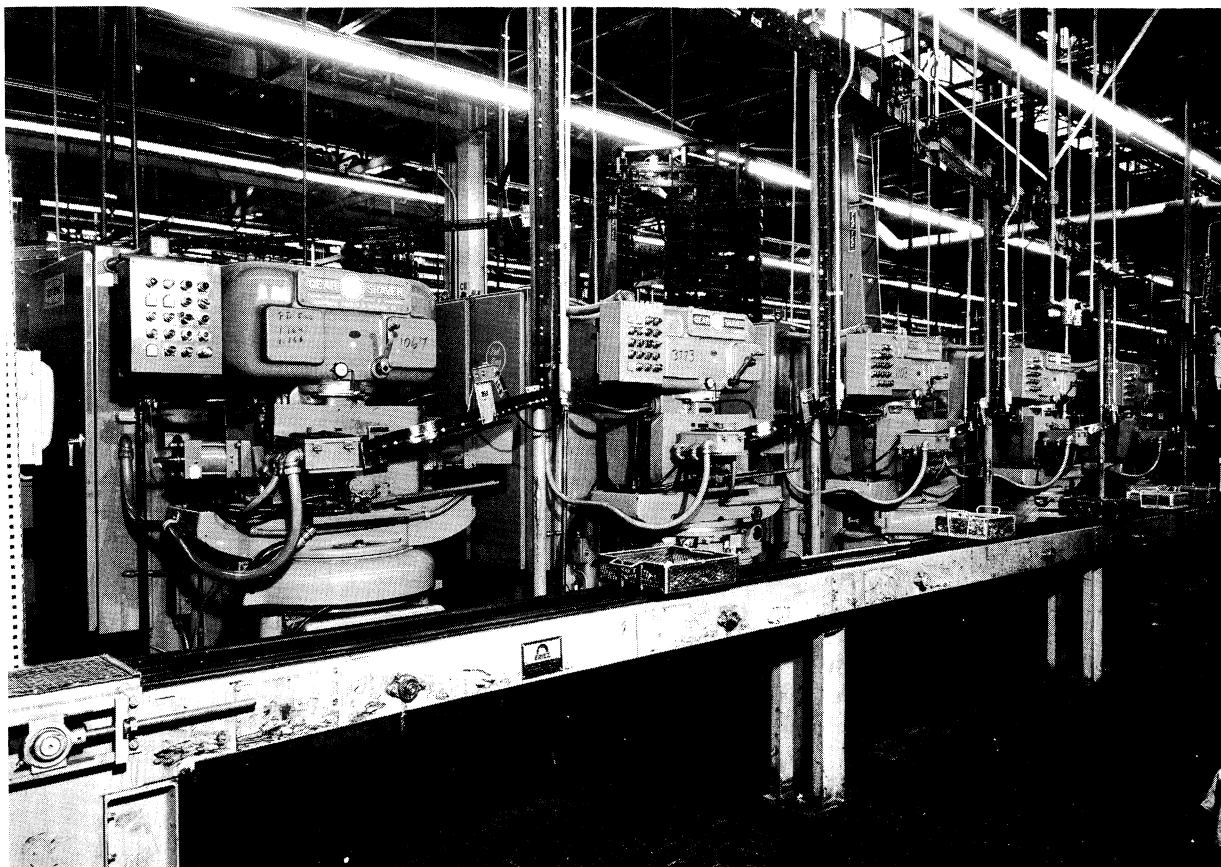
A battery of gear shavers for finishing automotive transmission planet pinions.
